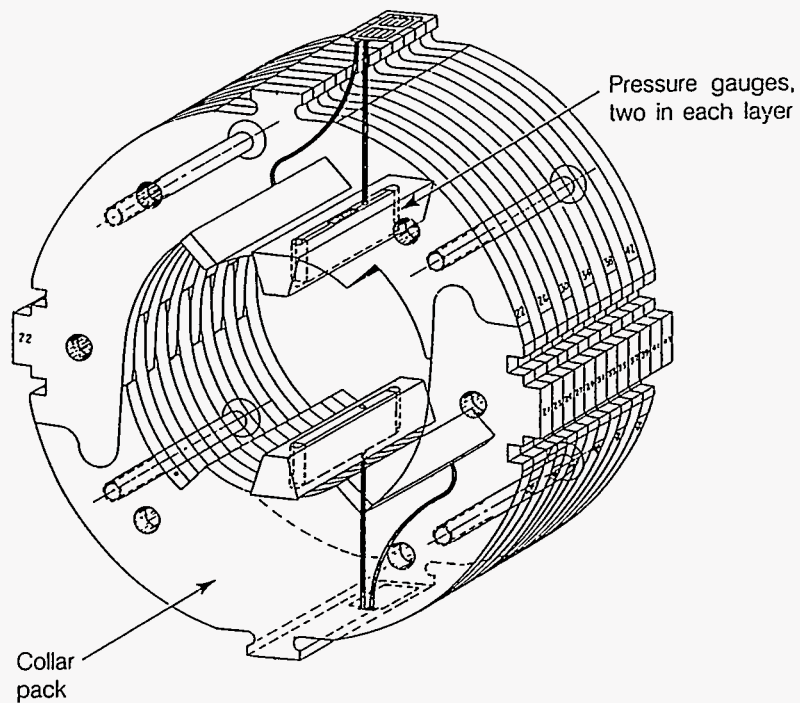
Illustration showing pressure gauges insulated in collars to measure winding pressure during assembly and operation of 4 cm LBL models.
